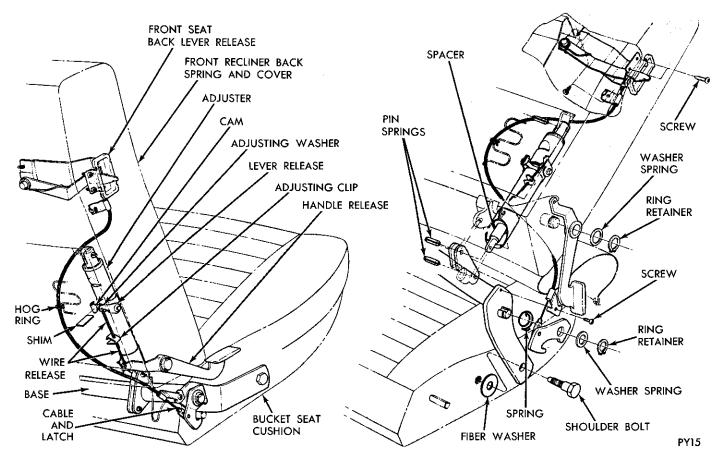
Reclining Seat Mechanism (Bucket Type)
